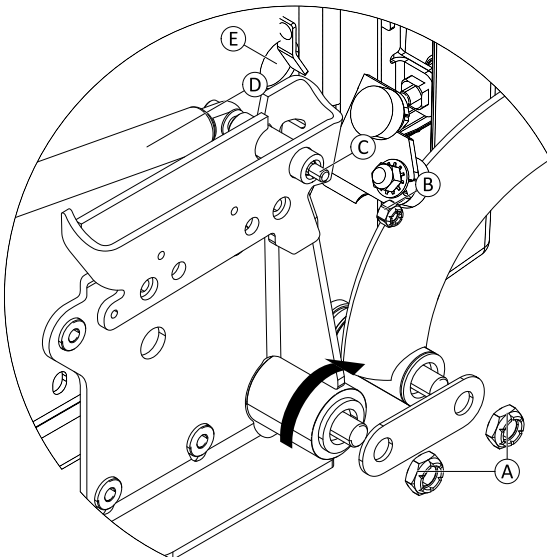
Detail view of right walking beam assembly. For better view top walking beam, fender and motor/gearbox unit are not shown.
